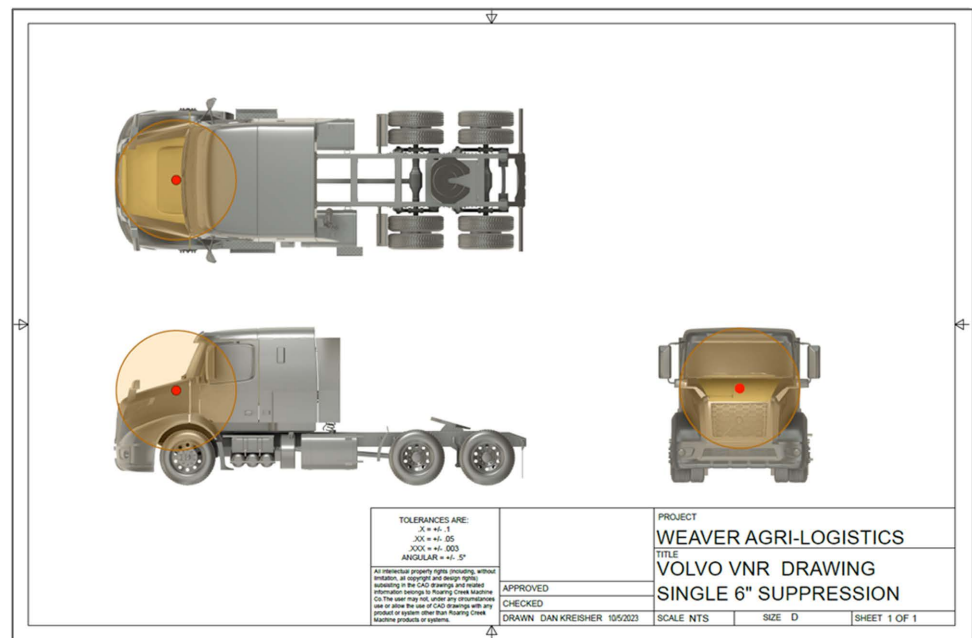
AutoCAD drawing of a single 6-inch EFEB blast radius.
